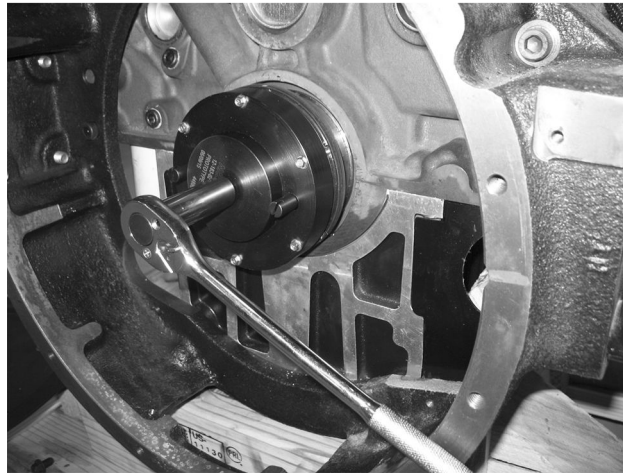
12-183-02 Rear Seal Remover – Retaining Screw.
